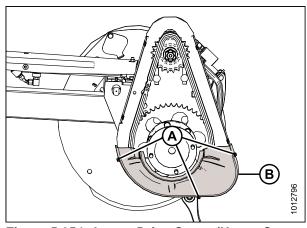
Lower Drive Cover (Upper Cover Removed)
